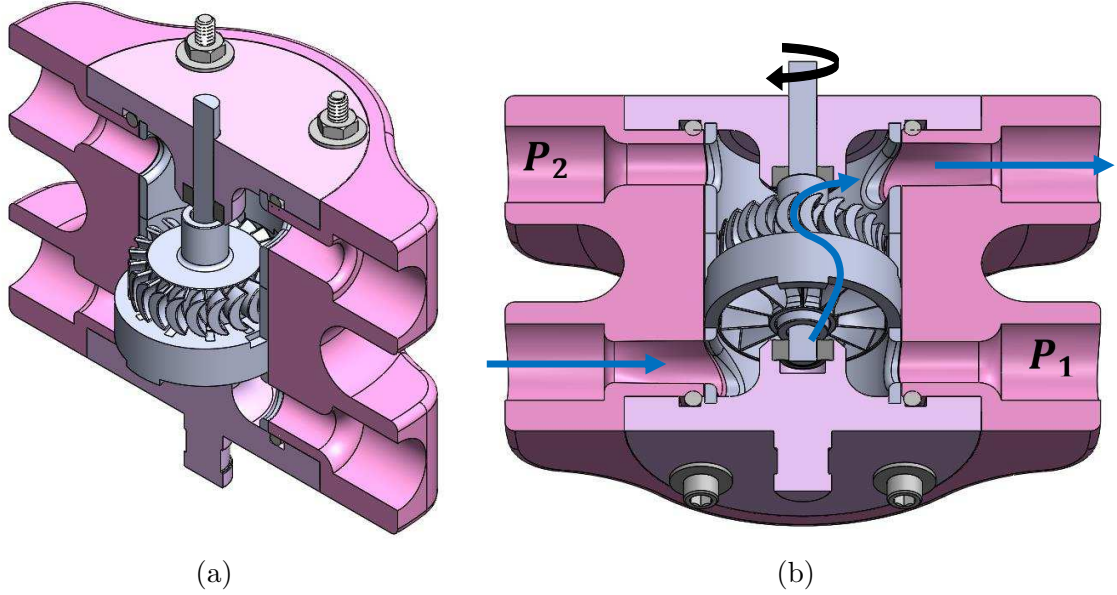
SOLIDWORKS® rendering of prototype assembly used for testing, showing (a) section view of internal components and (b) direction of fluid flow.
